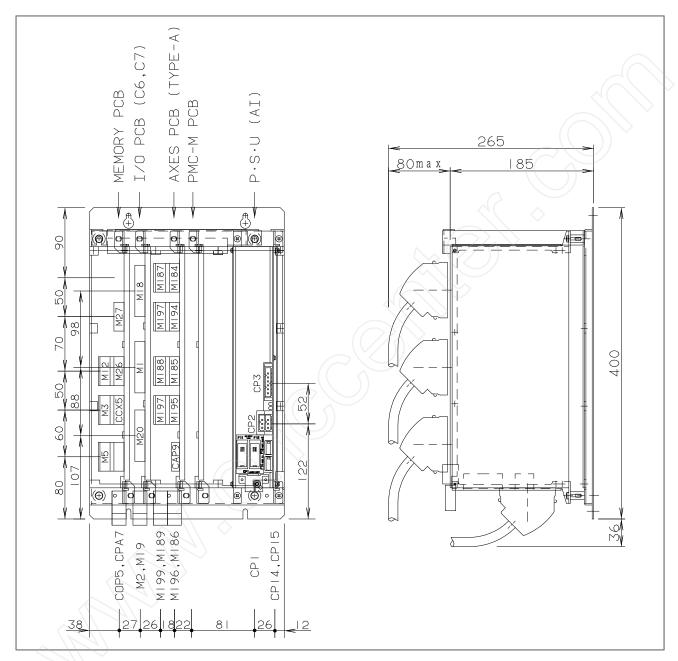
(a) Cable lead-in diagram (Type-A axis card, power supply unit AI is mounting)
